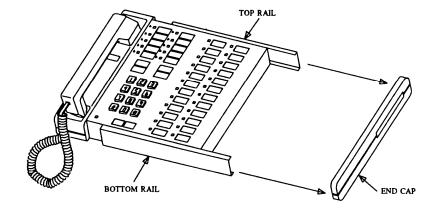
Remove End Cap, Then Top and Bottom Rail.
